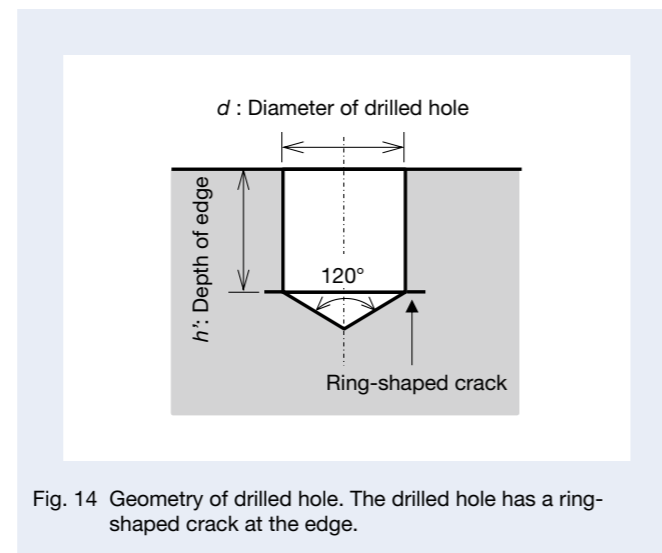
Geometry of drilled hole. The drilled hole has a ring-shaped crack at the edge.
